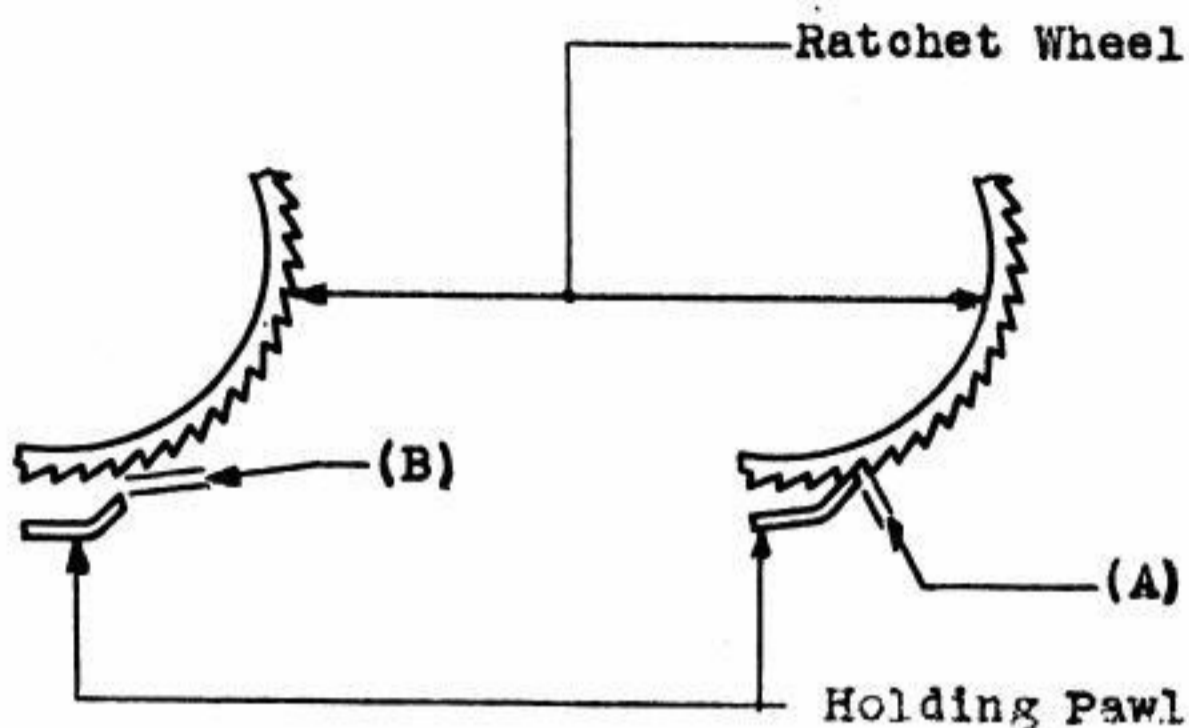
Engagement of Holding Pawl and Ratchet Wheel
